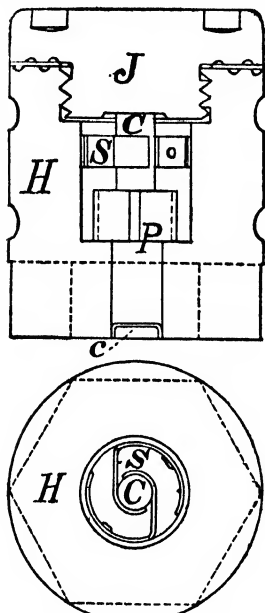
NOBLE PRESSURE GAUGE. *P*, piston; *H*, housing; *S*, spring; *C*, cylinder; *J*, closing plug.
